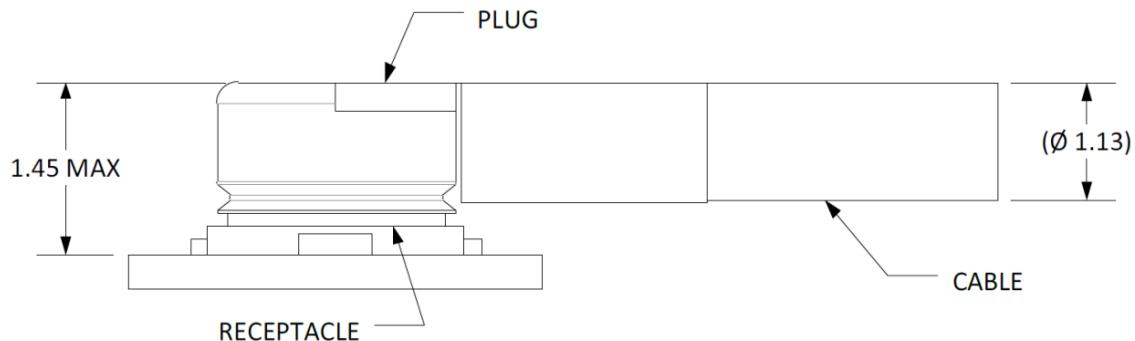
Space Factor of Mated Connectors (\varnothing 1.13 mm Coaxial Cables) (Unit: mm)
